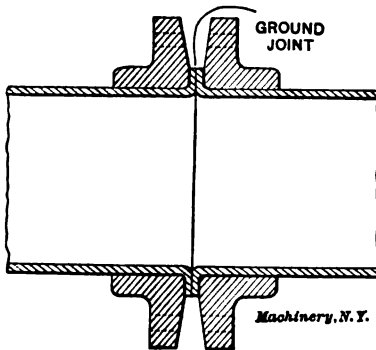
Pipe Joint with Flanges Shrunk on the Pipe
